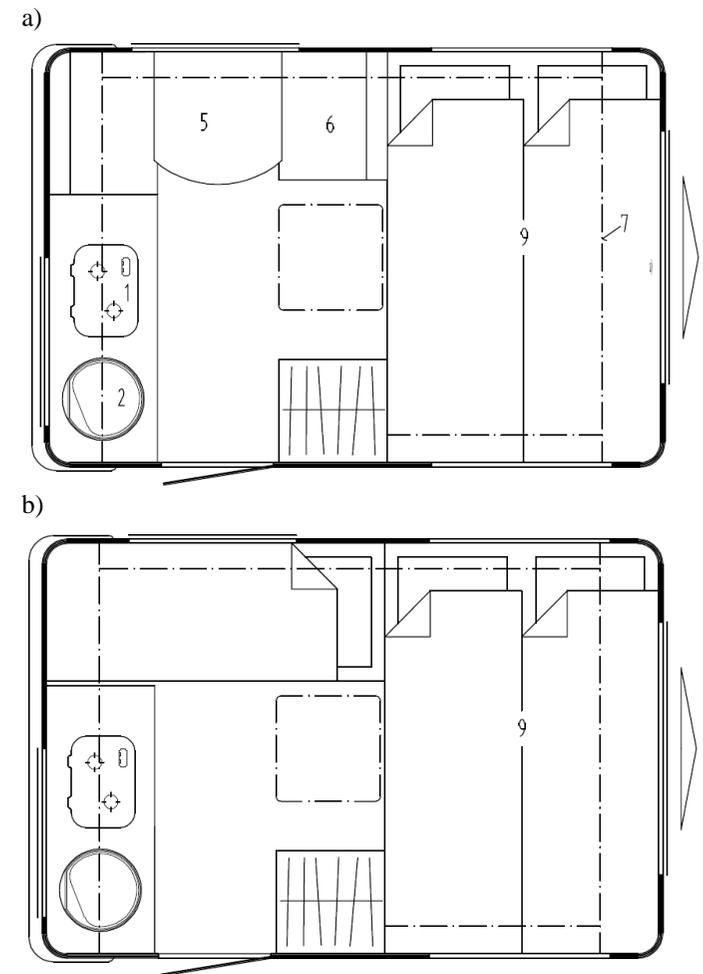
Day layout (a) and night layout (b) of the N126nn caravan (1 - gas stove, 2 - sink, 5 - table, 6 - wardrobe, 7 - hanging cupboards, 9 - sleeping spot of 130x193 cm).
